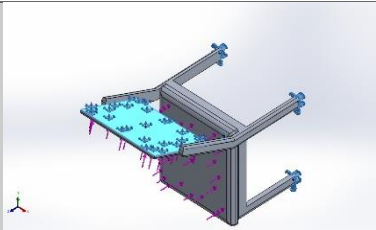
Applying fixtures in the five faces of the selected sewing chair model
